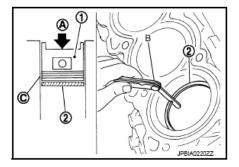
Measuring Piston Ring End Gap Using Feeler Gauge Courtesy of NISSAN NORTH AMERICA, INC.
